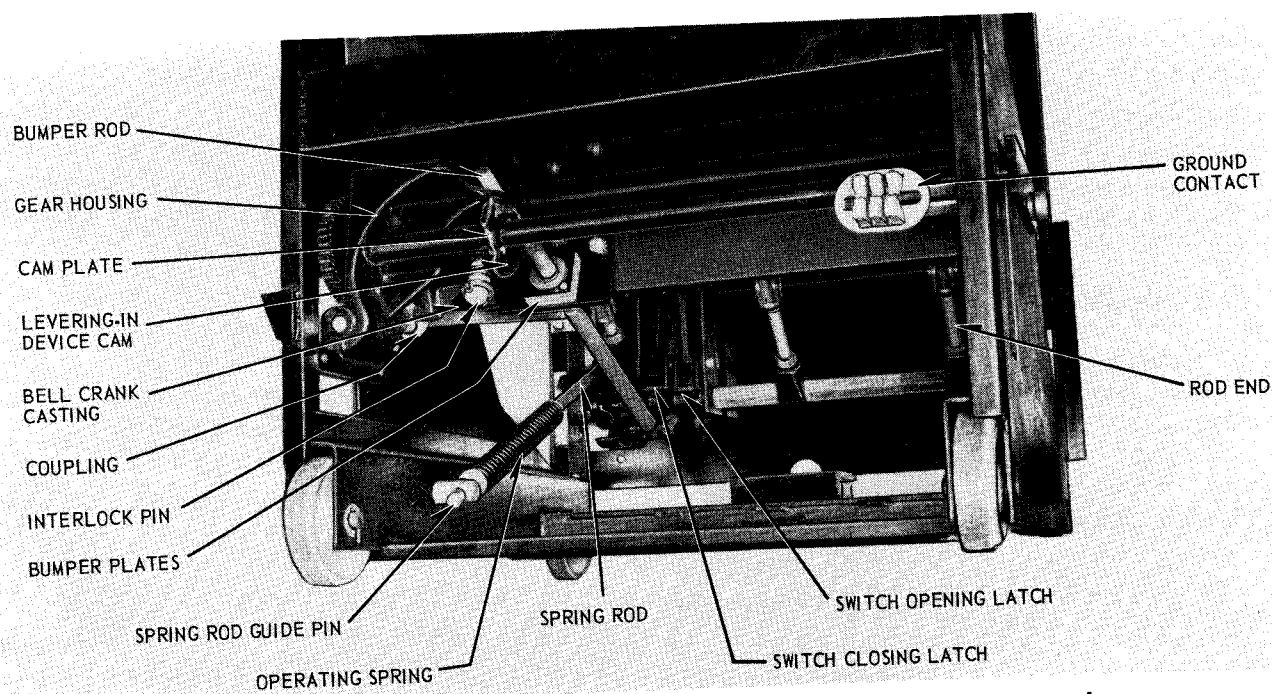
Operating Mechanism, Rear View, Switch Closed and Spring Discharged
